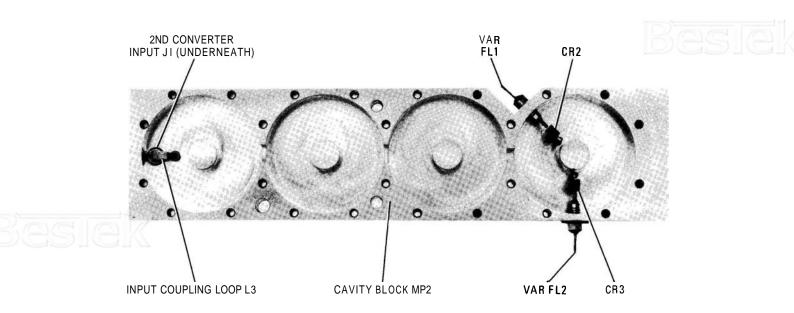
SECOND CONVERTER ASSEMBLY A5, COMPONENT LOCATIONS (1 OF 2)
